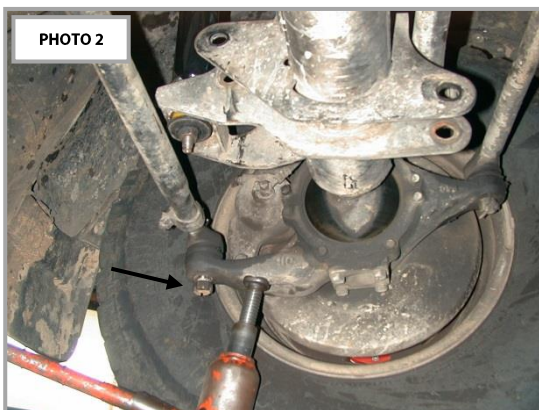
Remove the front trailing arm to differential mounting nuts and bolts (24mm). It may be necessary to loosen the nuts on both side arms and use a bottle jack under the differential to stop twist. On Nissan it may be necessary to remove the track rod on one side to allow the arm to be removed and on LWB model remove the stabilizer bar.
